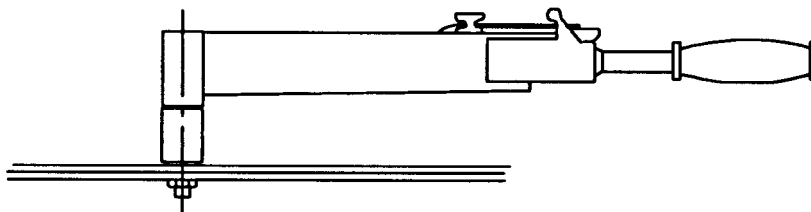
Handling of Torque Wrenches Using a Universal Joint
